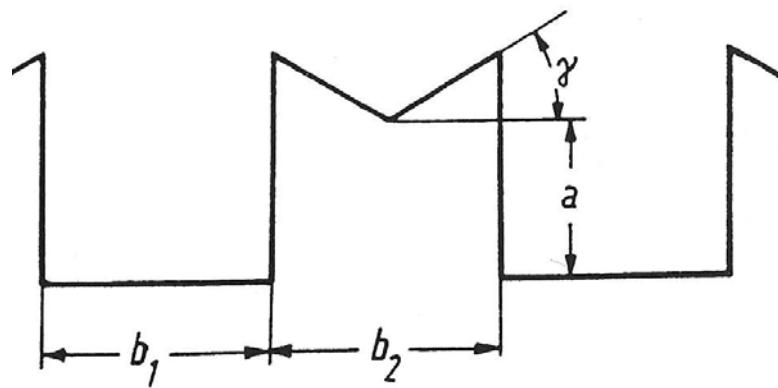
Dimensions of an M-shaped serrated trailing edge (Source: Tanner [8])
